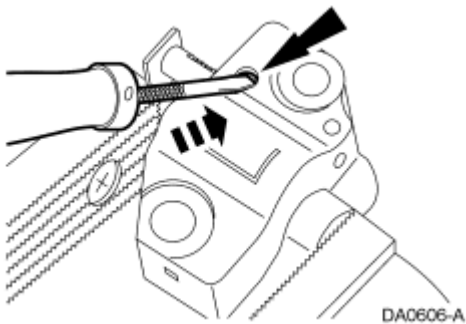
Pushing Back And Holding Ratchet Mechanism
